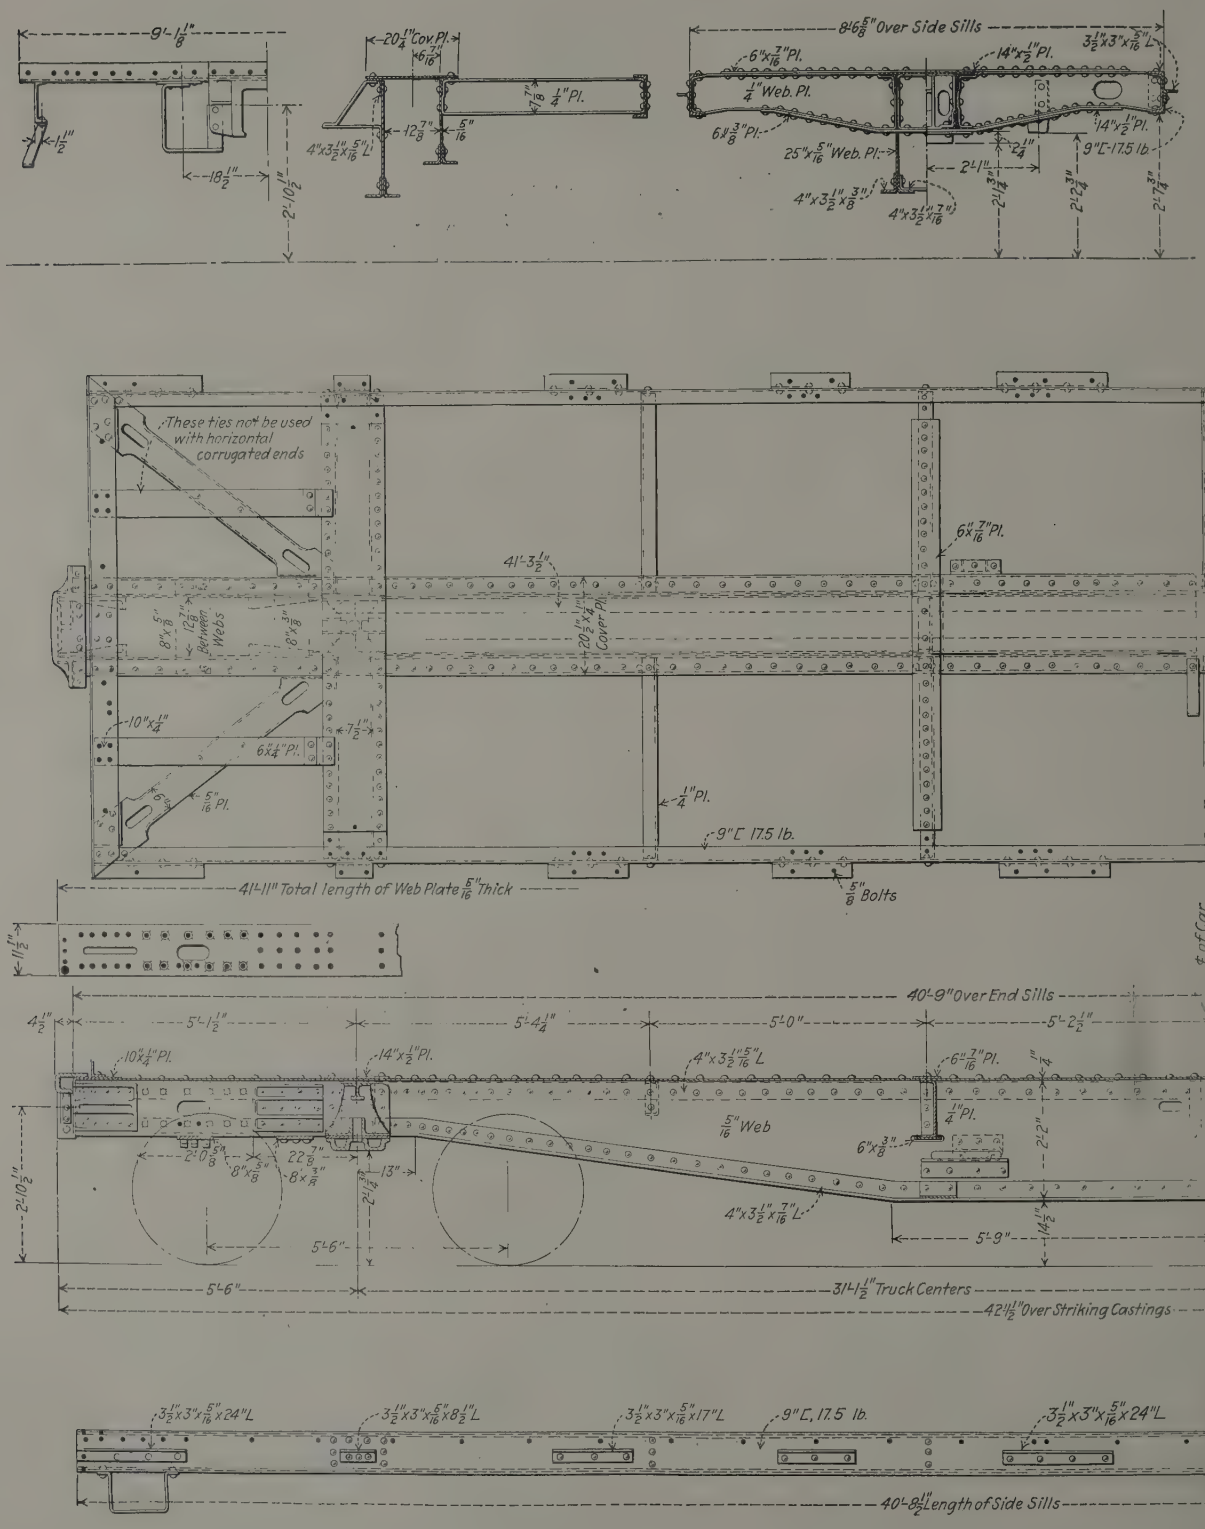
Steel Underframe for 40-Ton Double Sheathed Box Car Shown in Figs. 2849, 2852 and 2853.
